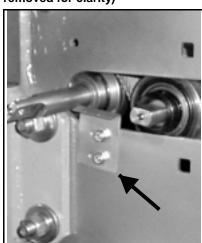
Mounting the new tension roller adjustment bracket (install 3 spacers per slot)
